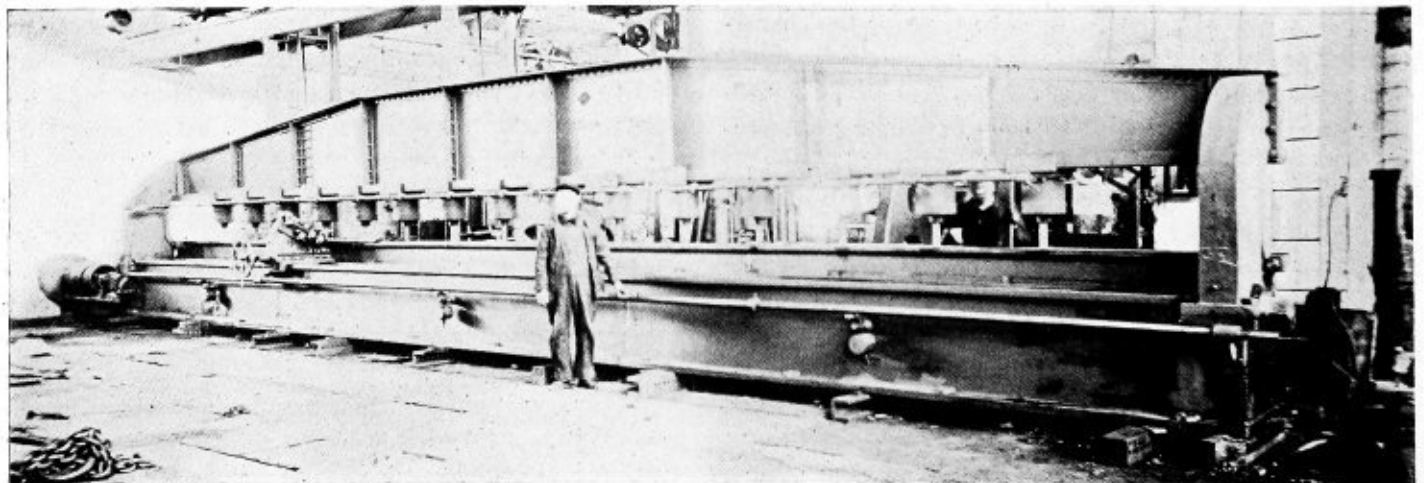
Covington Plate Planer, Designed for Edging Plates Up to 40 Feet Long and 1½ Inches Thick
